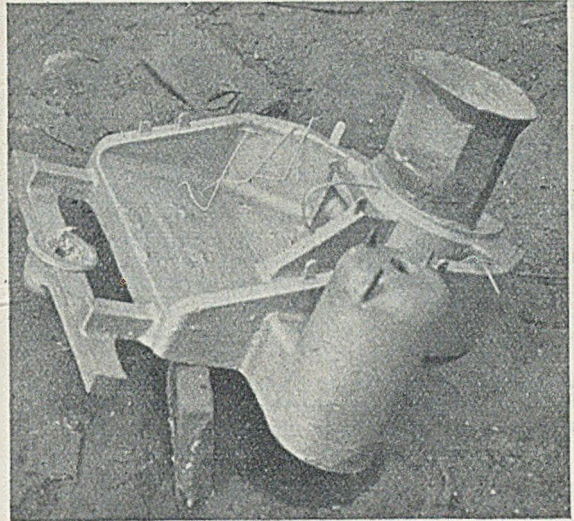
Casting made with Top Ingates from a Bottom Runner Bar.
